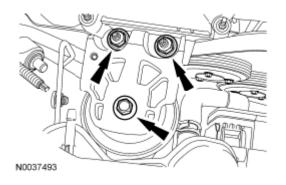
Locating Transaxle Mount Bolts Courtesy of FORD MOTOR CO.
